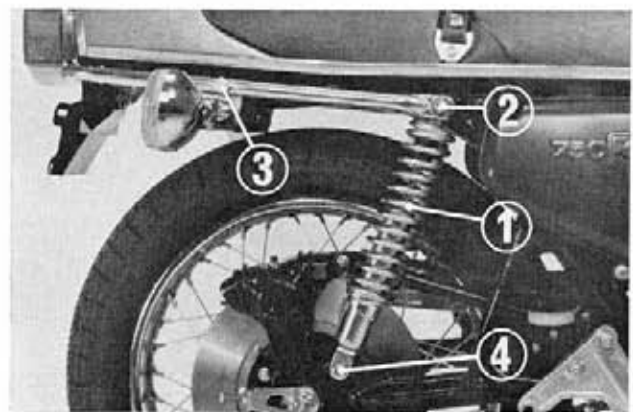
① Rear shock absorber ② Rear shock absorber mounting nut
